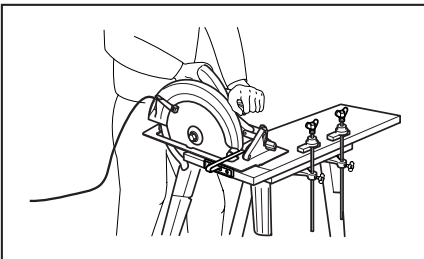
A typical illustration of proper hand support, workpiece support, and supply cord routing.
